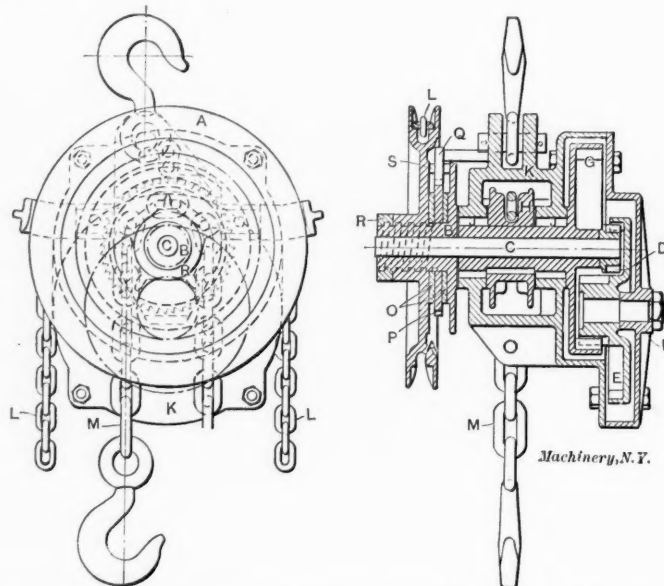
Elevation and Section showing Gearing and Automatic Brake.
